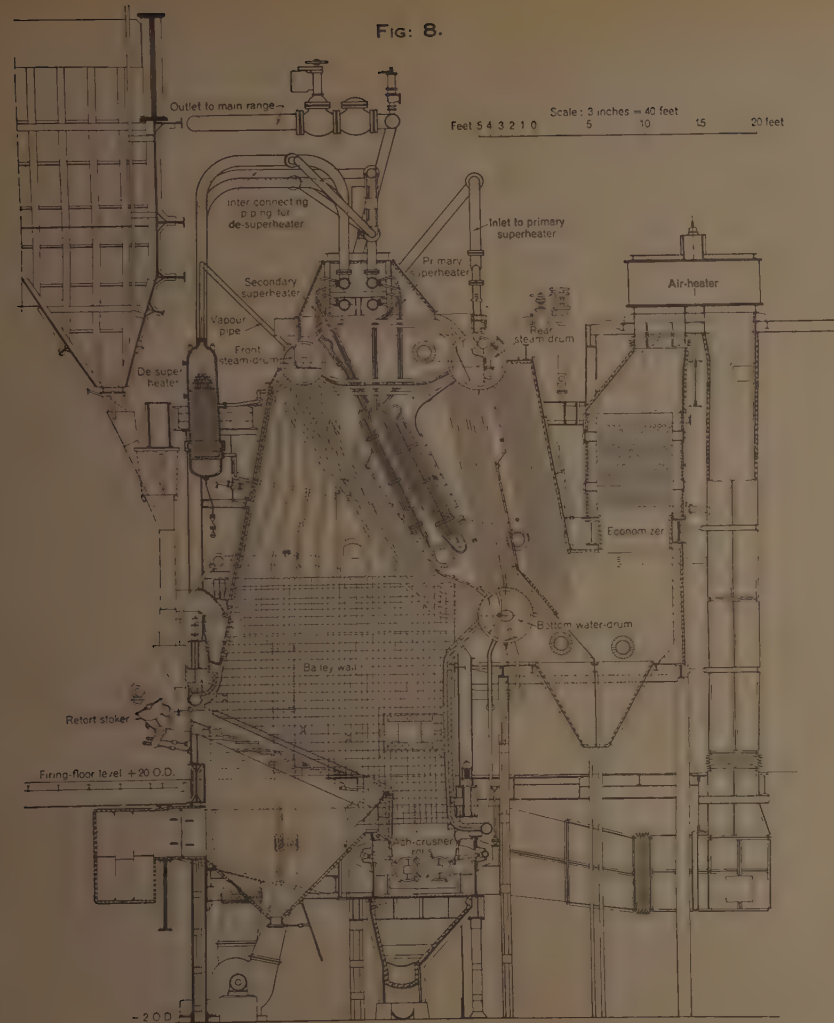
TYPICAL BOILER UNIT: EVAPORATION 260,000 LB. PER HOUR.
